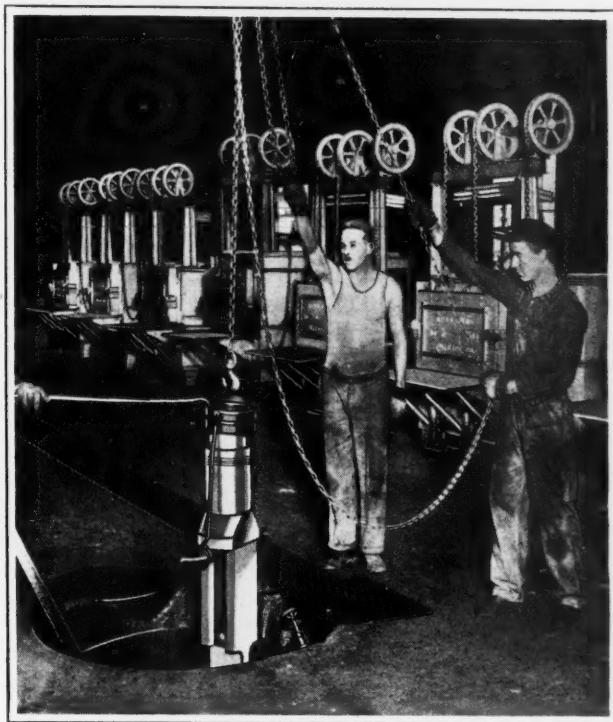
Quenching Tanks are Located below the Floor Level to Conserve Floor Space and Facilitate the Quenching Operation
